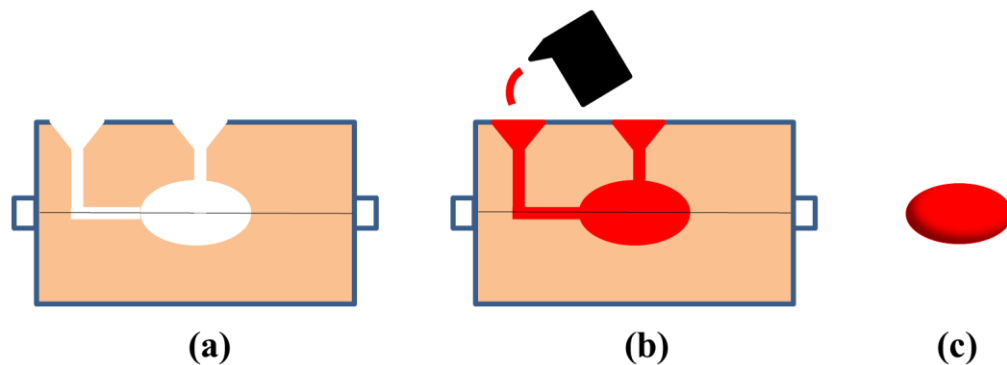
Traditional sand-casting process; (a) Assembled molds, (b) Pouring liquid metal and (c) final solidified casting without the riser.
